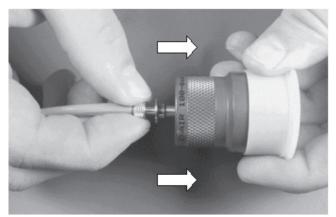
Grip Knurled Insert Body and Press Into Cavity
